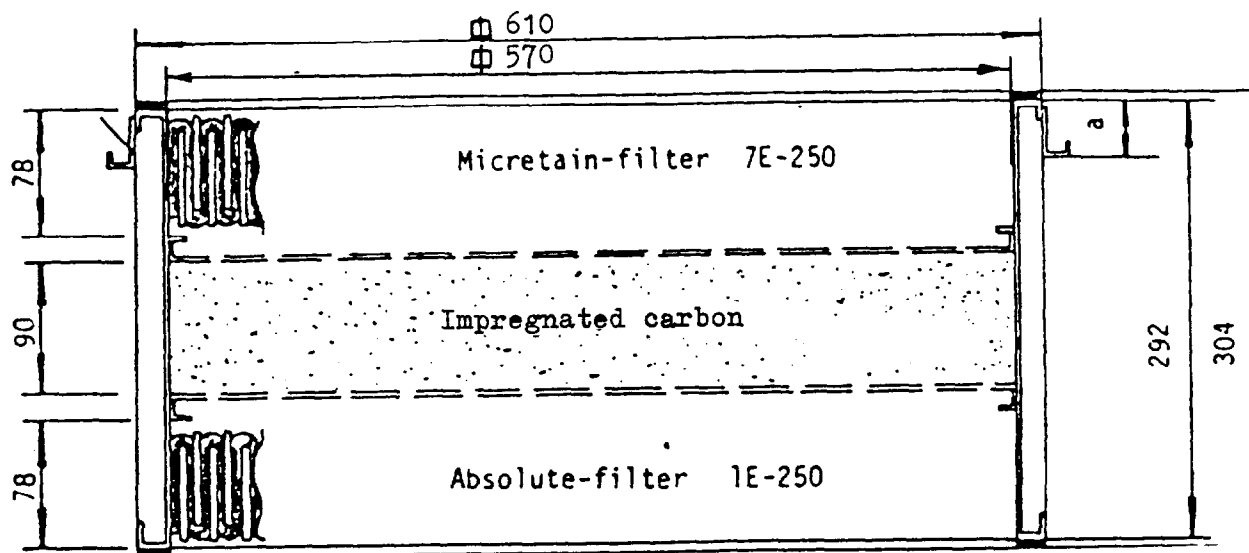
Exempel of a triple filter, manufacturer Camfil. Measurements in mm.
